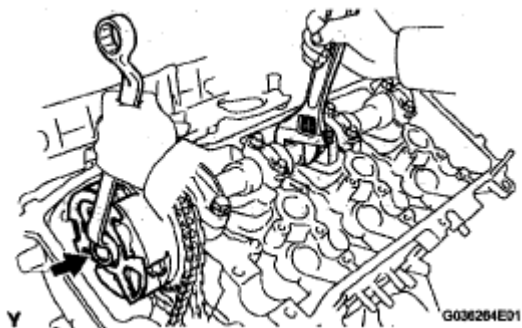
Identifying Timing Marks Of Camshaft Timing Gear
